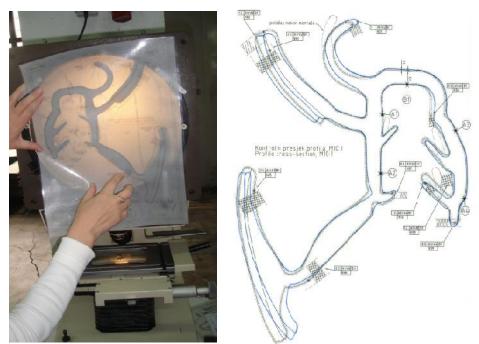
Extruded obtained by practical testing using optimized tool with XFlow [2]
